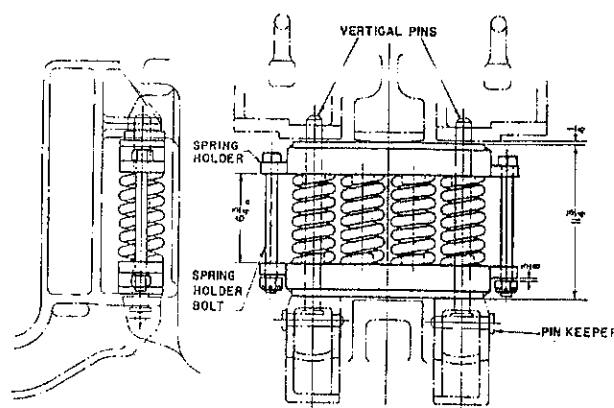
TRACTION MOTOR NOSE SUPPORT
